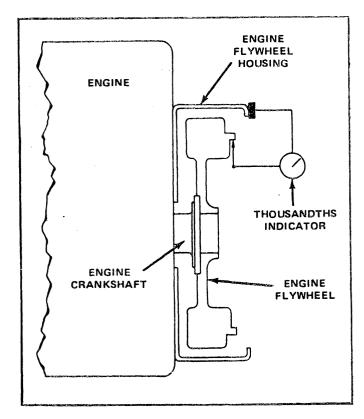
Checking the driving ring pilot bore of engine flywheel.
